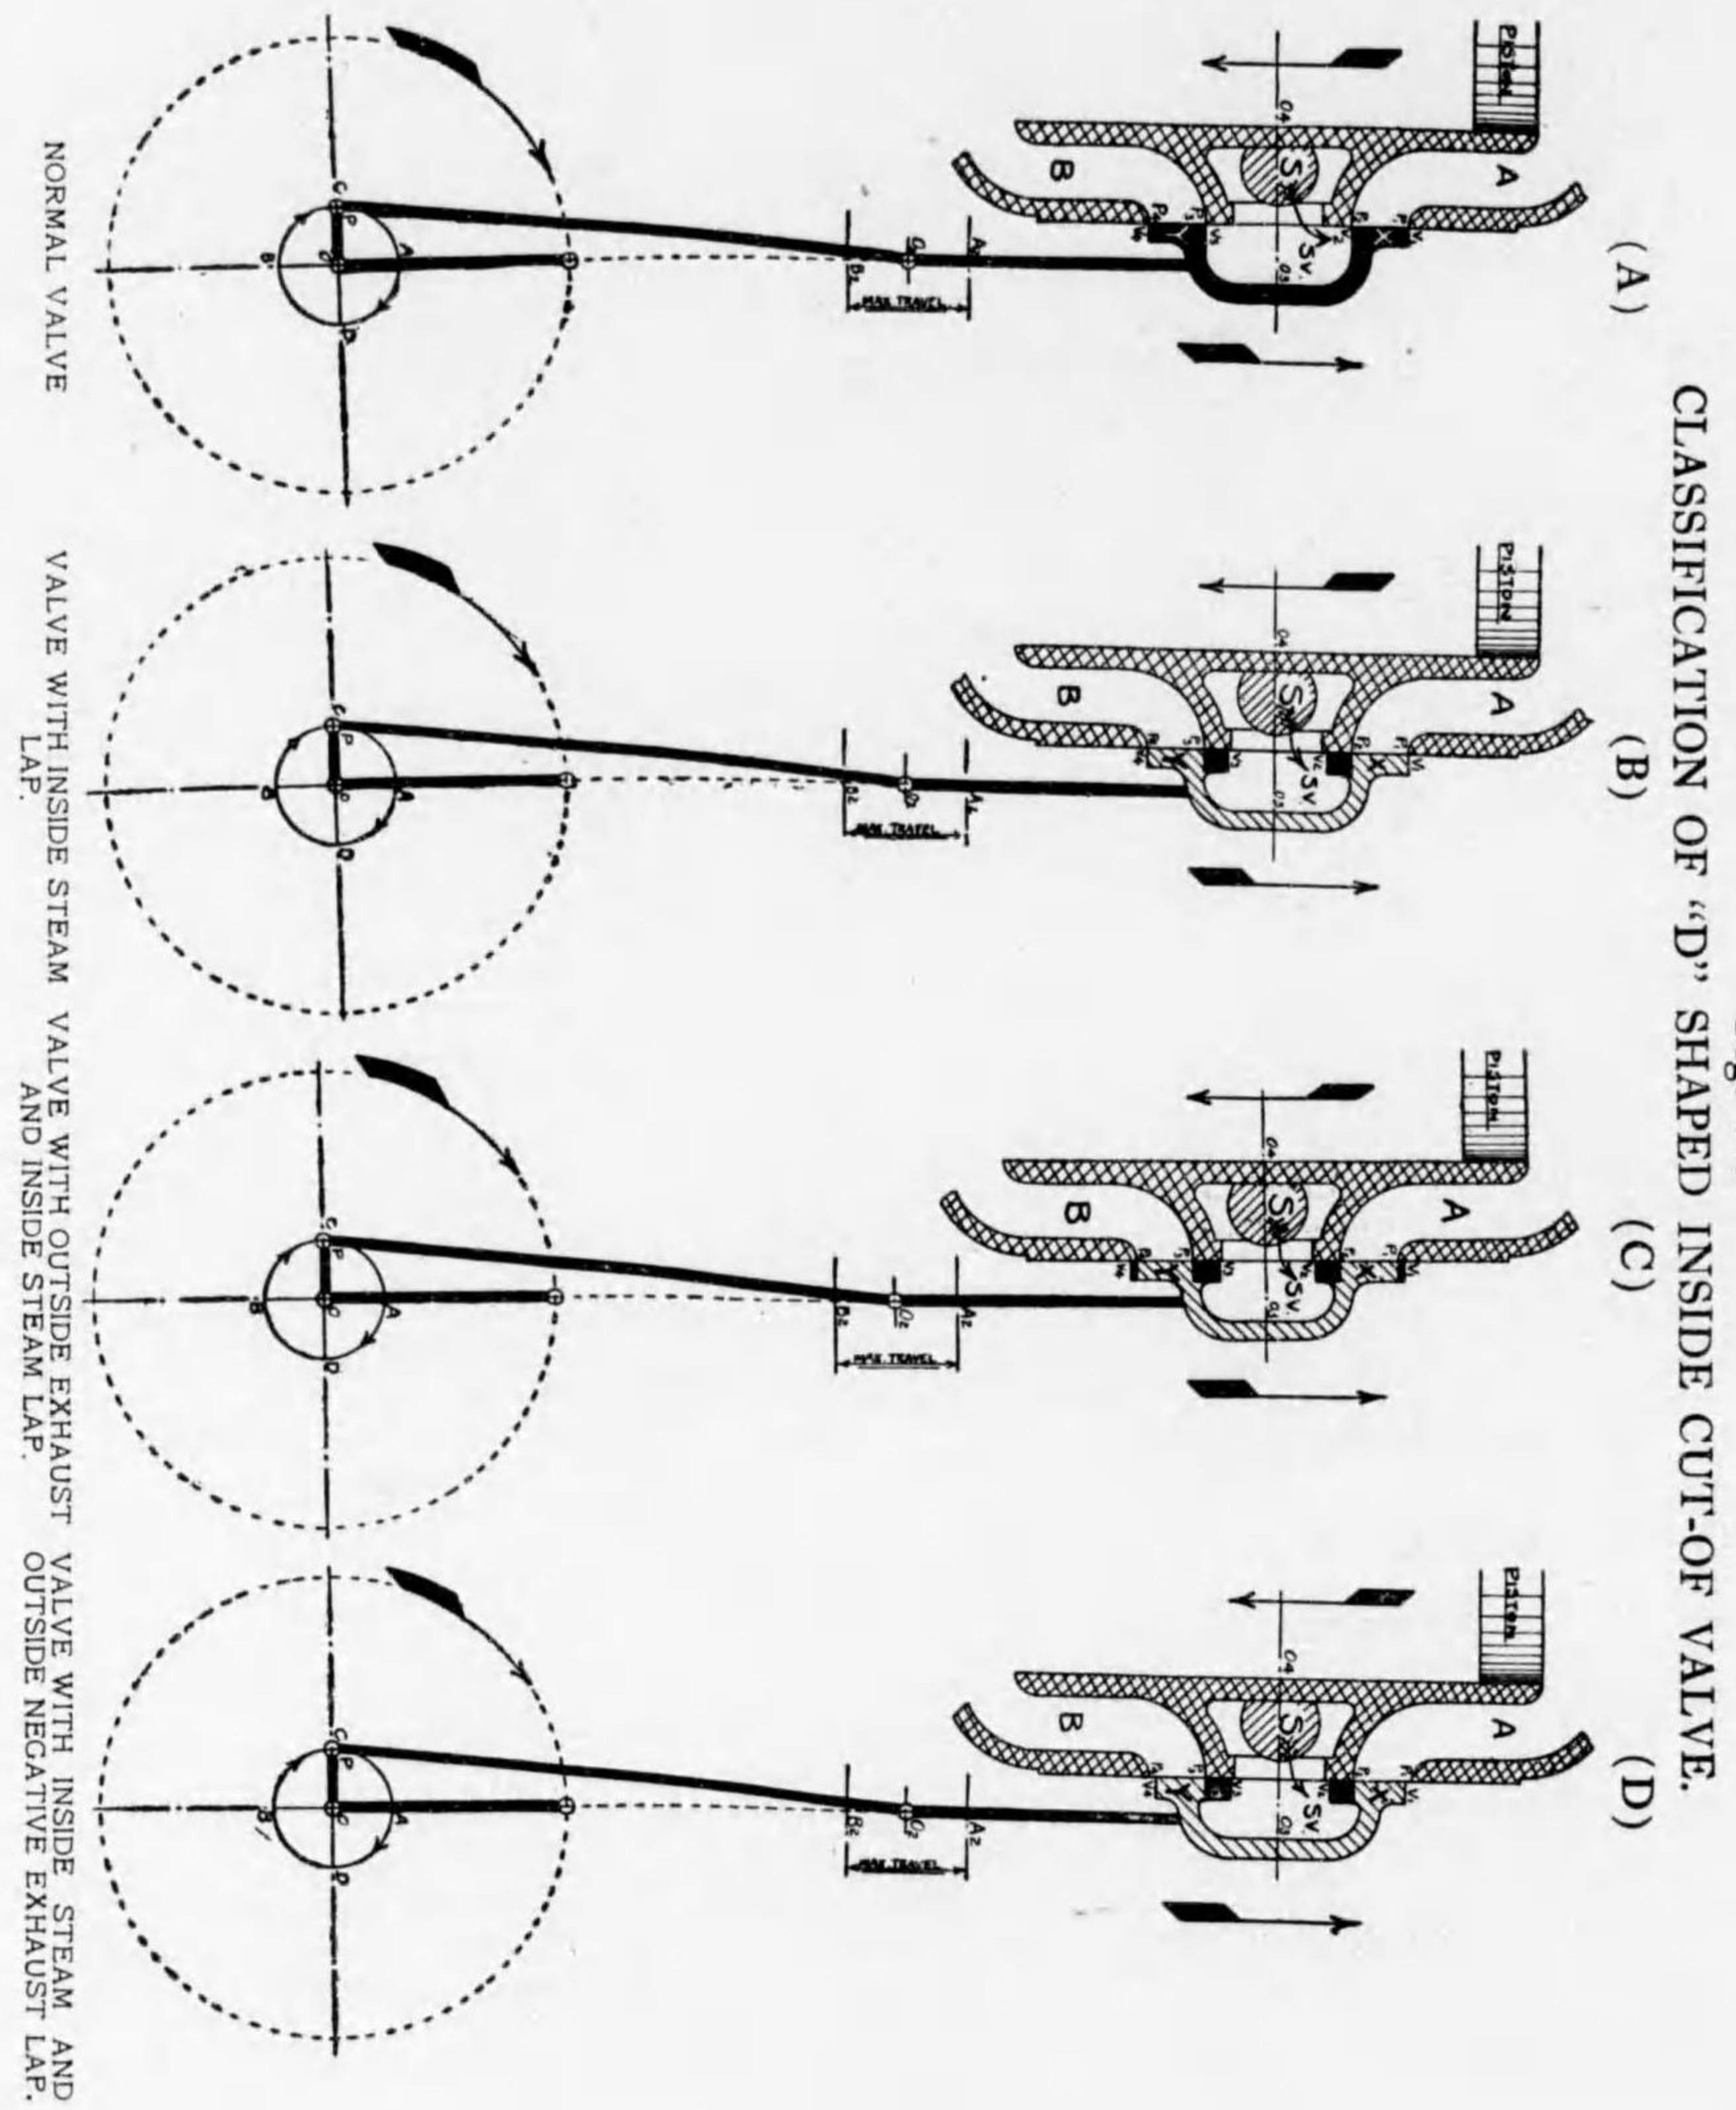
LEAD AND ANGULAR ADVANCE OF SEVERAL KINDS OF "D" SHAPED VALVE.
